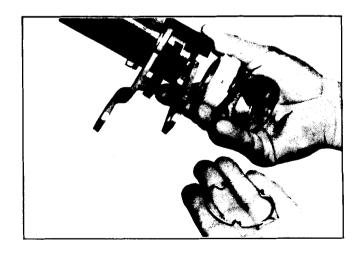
Removing Bearing Adapter, Bearing and FIRST/REVERSE Lever - Manual Transmission
